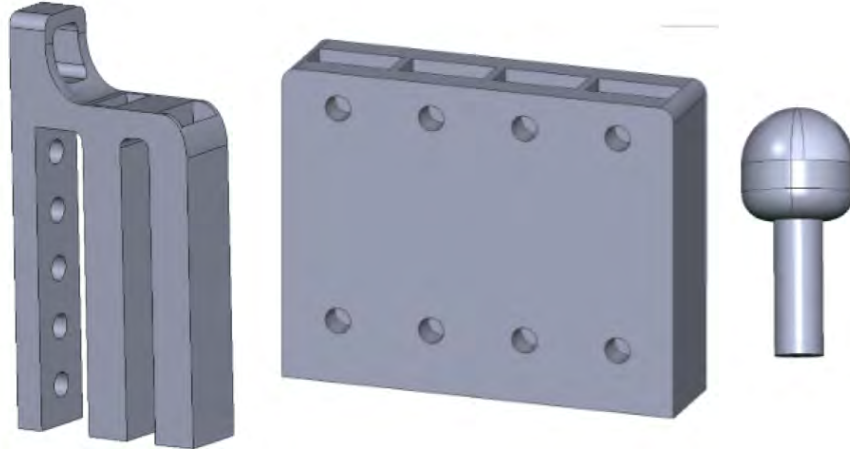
CAD drawings of magnet rack, magnet housing, and pin
